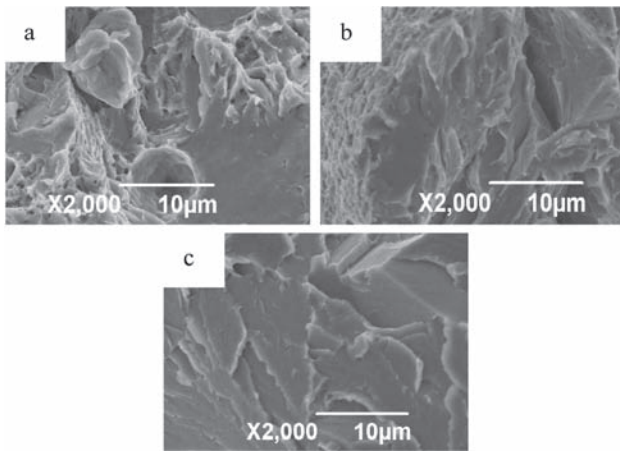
Fracture surface of CVN specimen after a) HT1, b) HT2, c) HT3
